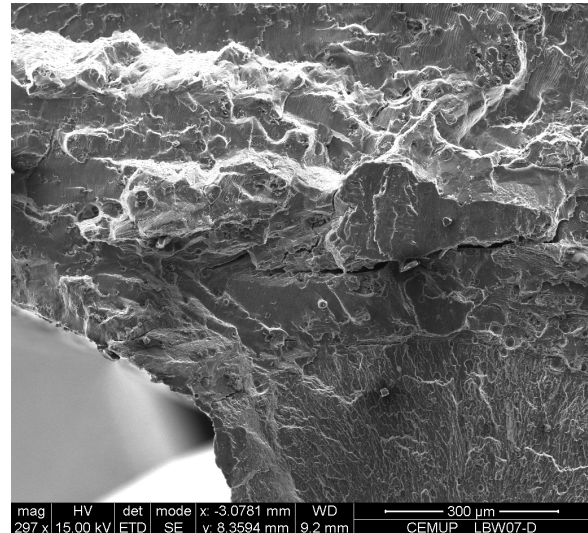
T-joint LBW2-T6 as-welded R=0,1.
